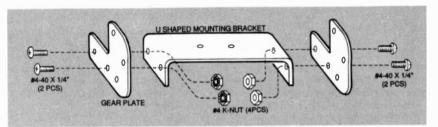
THE MAIN ASSEMBLY that holds the gears and wheels is composed of two side gear plates and one U-shaped bracket. Detailed mechanical drawings can be purchased from the source given in the Parts List.
